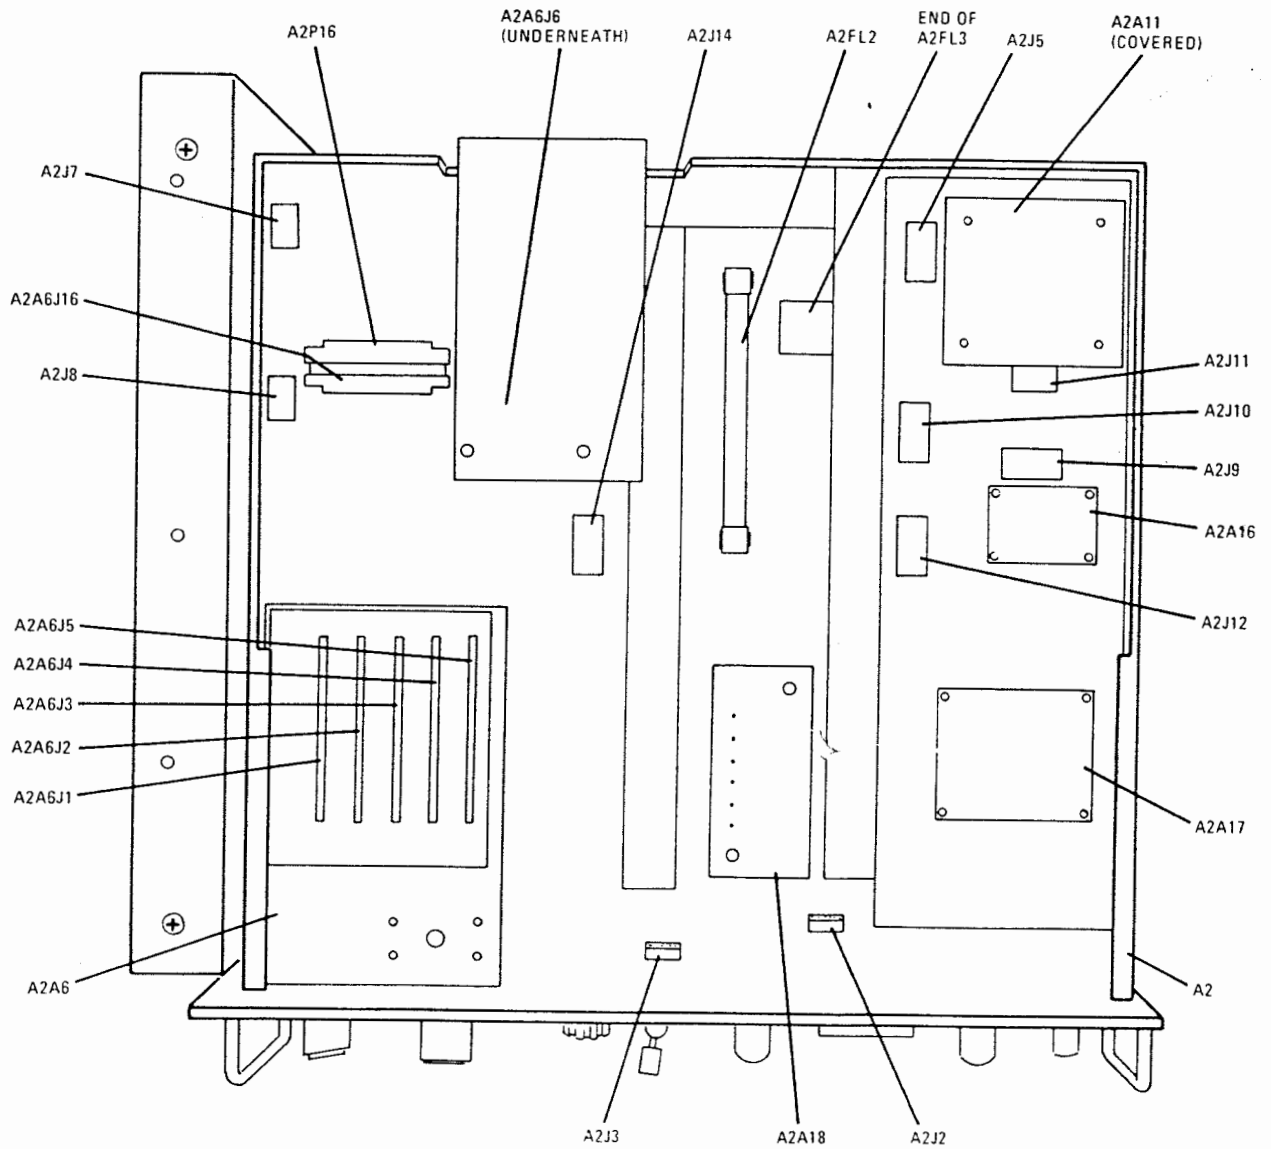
Panel and Chassis Assembly A2 Component Locations Bottom View
